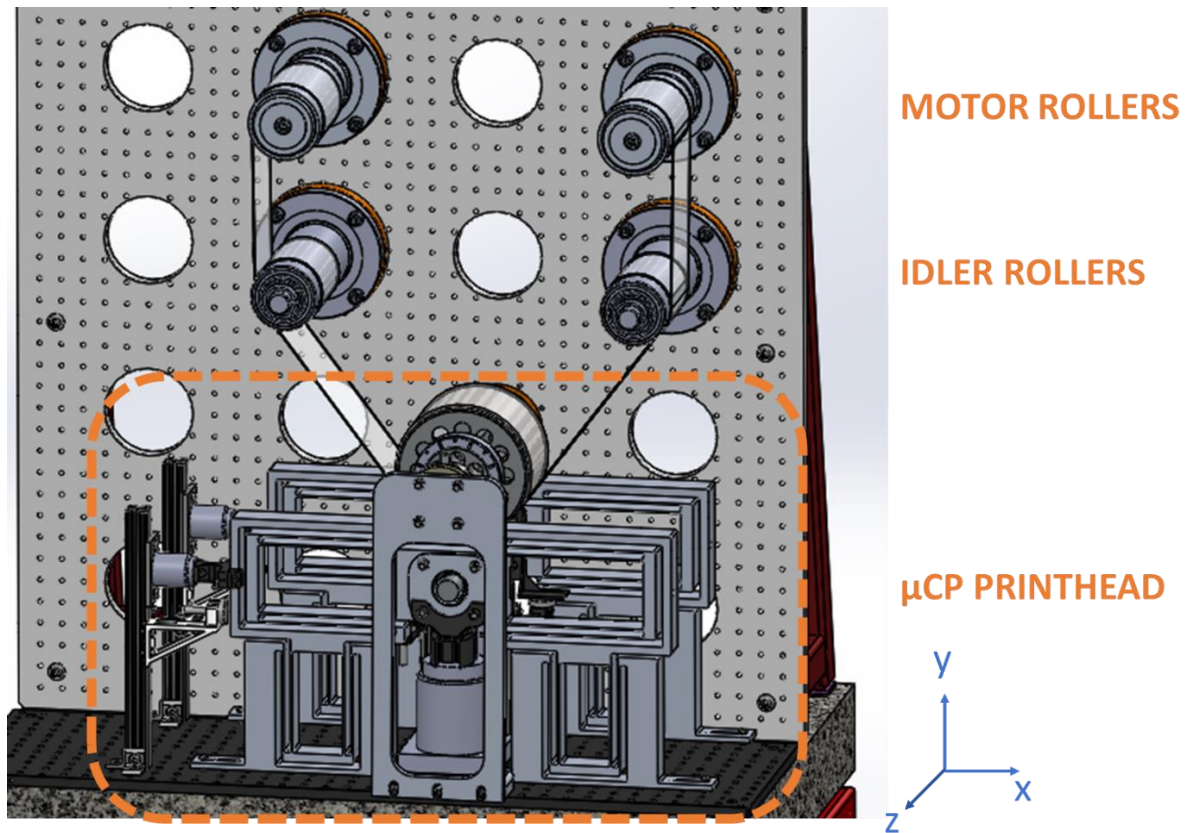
SolidWorks 3D model of the entire R2R assembly, minus the PDMS stamp.
